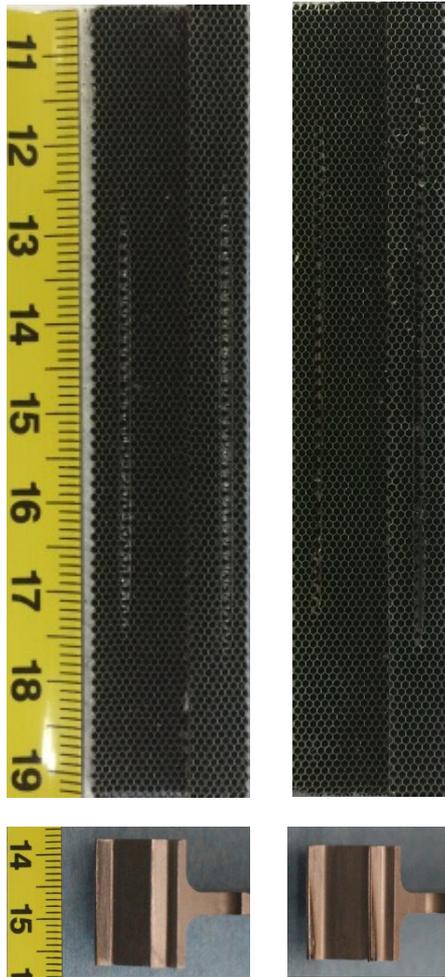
Details of blocked honeycomb for test 6# and 7#.
